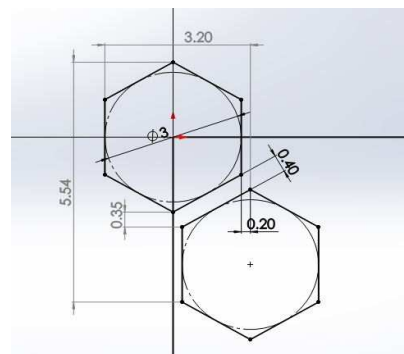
Two-dimensional design of the honey comb with the used dimensions in the modeling [9]
